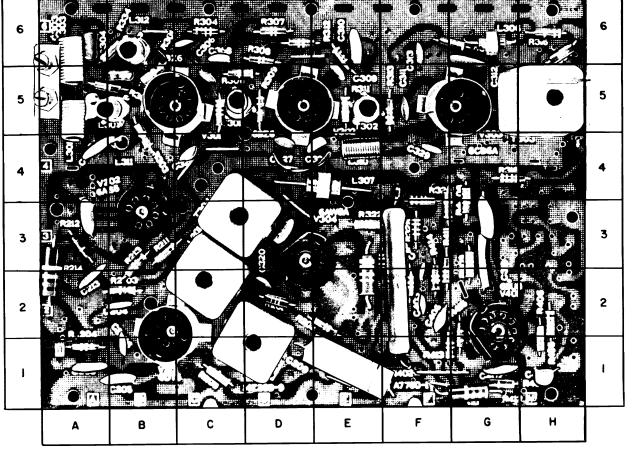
View of Component Side of Etched Circuit Board 14E268-9. Used in Models with Single Ended Sound Output. Refer to Parts Location Table "B".
